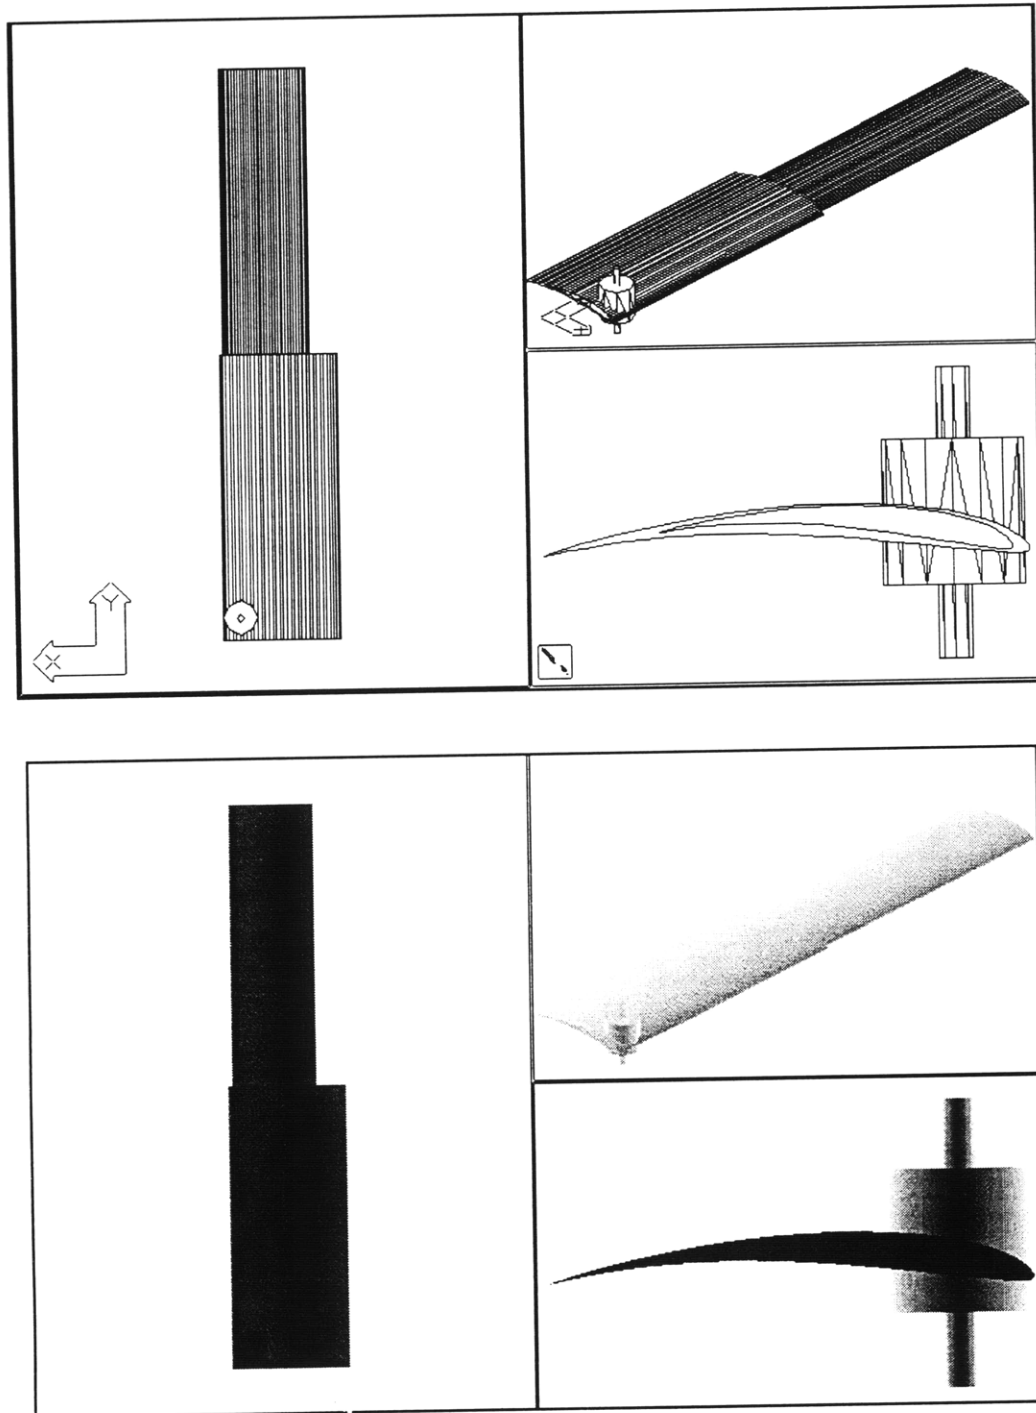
WING AND DEPLOYMENT MECHANISM.
